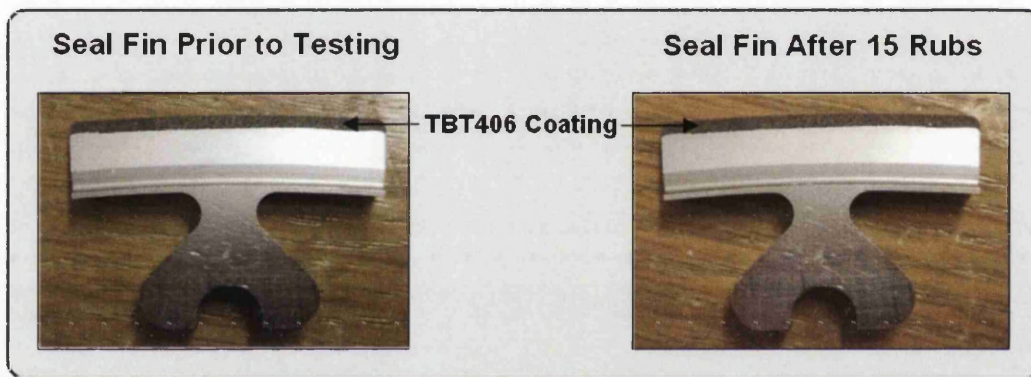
TBT406 tipped seal fin test piece before and after abrasability testing
